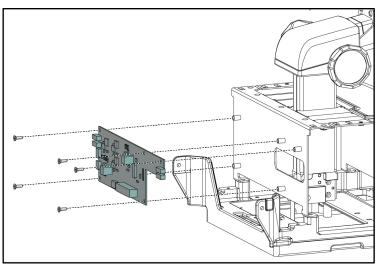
Removal/replacement of Biopsy Arm Motor Drive Board
